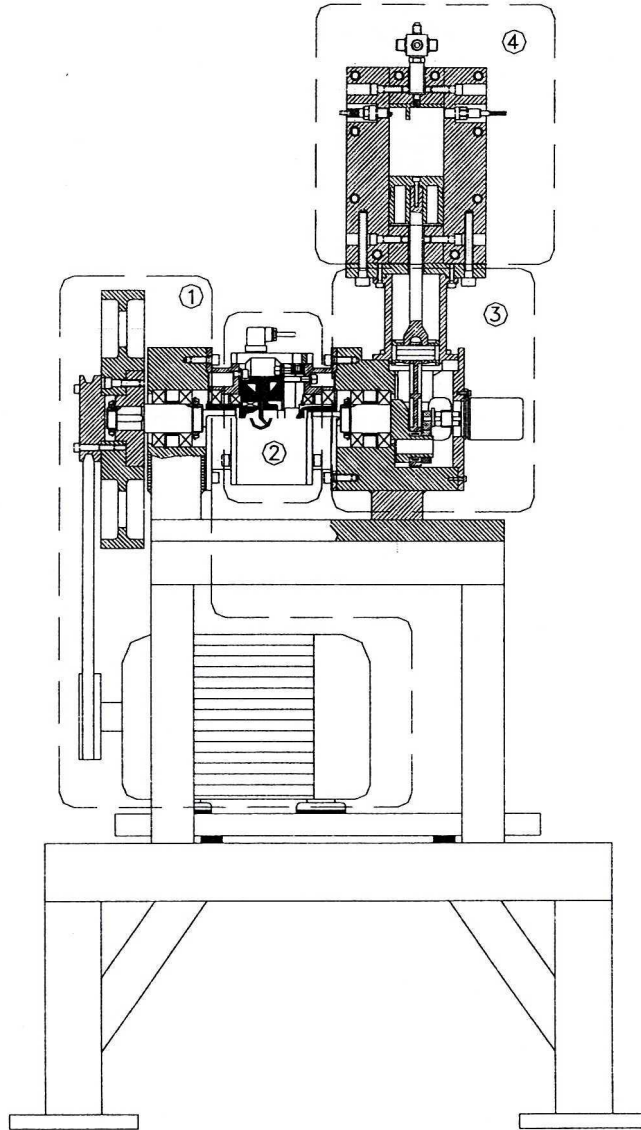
General layout of the SCM: 1 – driving unit; 2 – electromagnetic clutch-brake unit; 3 – crank mechanism; 4 – research section
